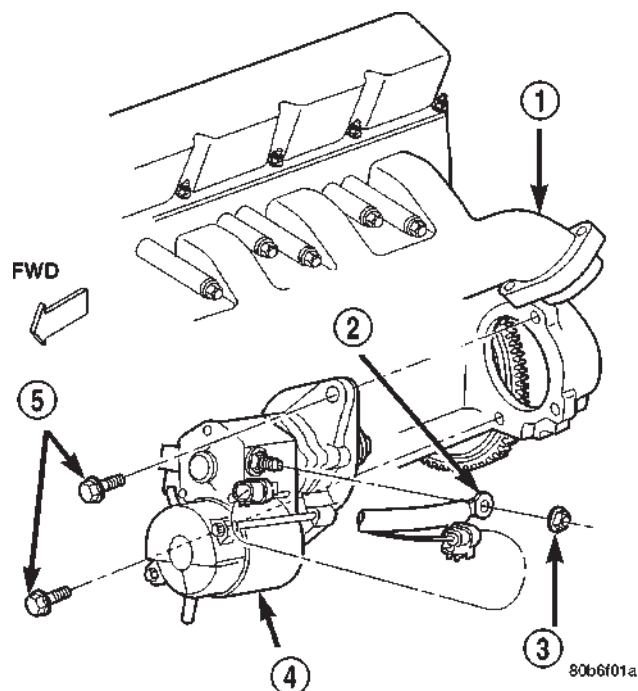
Starter Motor Remove/Install - 8.0L Gasoline Engine
